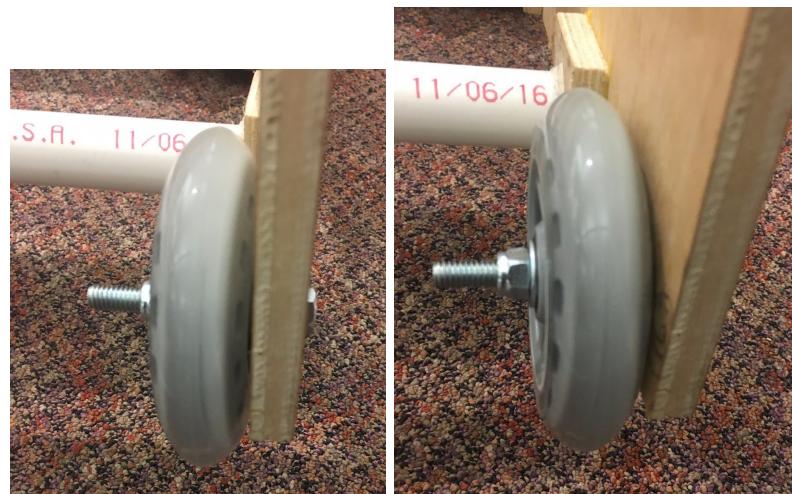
,7b: Side view of wheels connected to the sidebars of chassis
